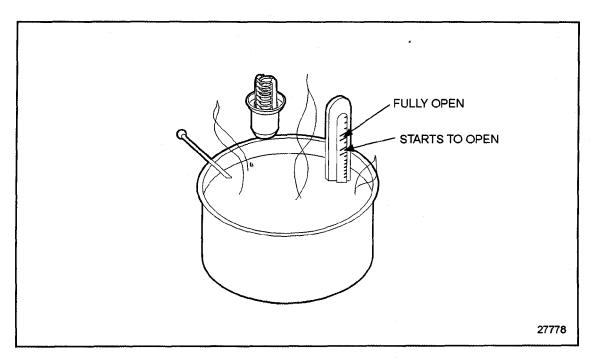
Checking Thermatic Oil Control Valve Operation
